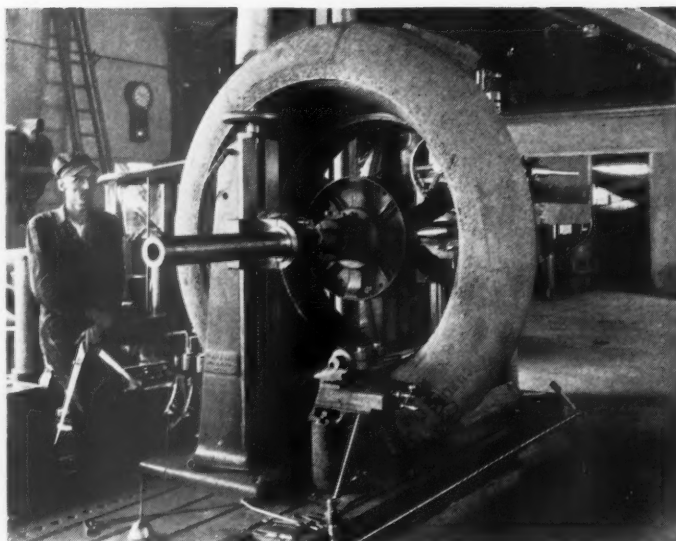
Repairing seal ring damaged when impeller of large pump came loose
